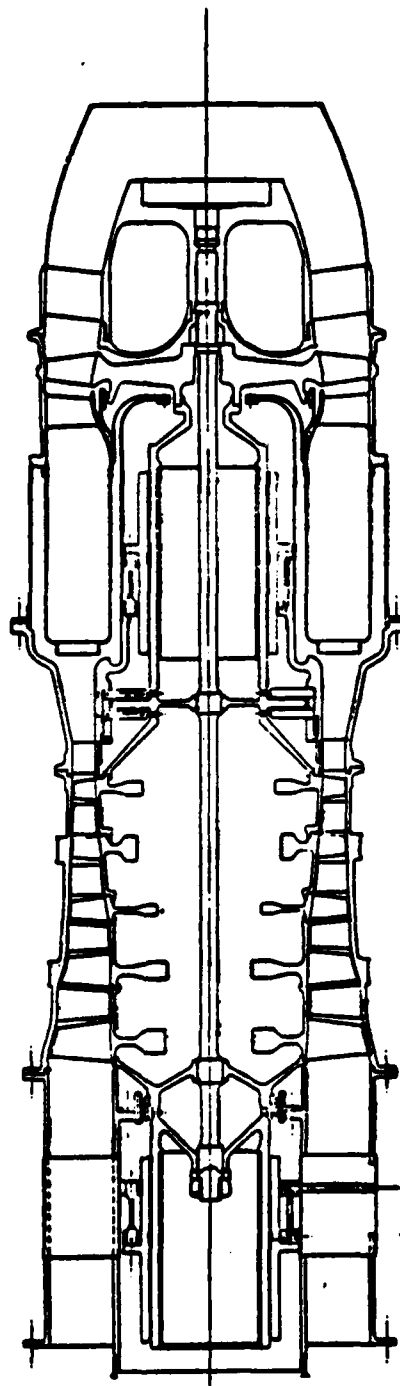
TJE331-1029 Thrust Engine, 3.5-Inch Diameter Journal.
